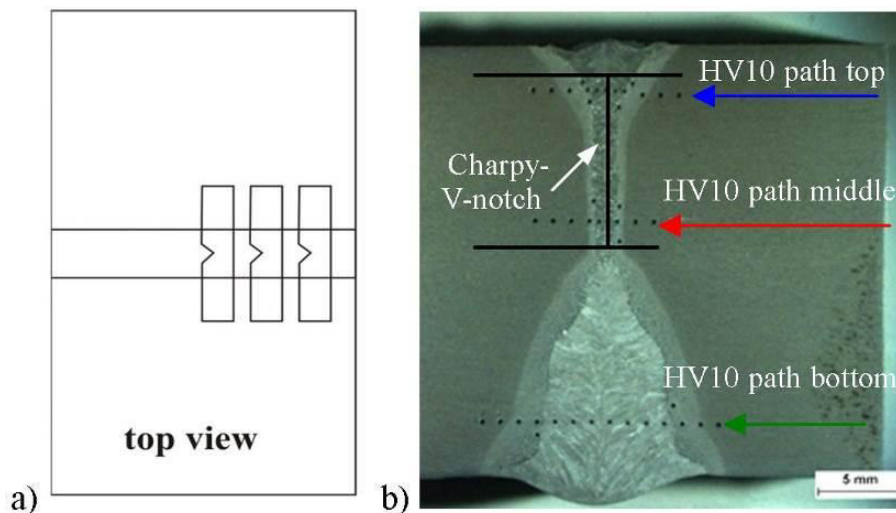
Taking plan for Charpy test specimens (a) and location of Charpy-V-notch as well as HV10 paths in details (b), root face 14 mm
